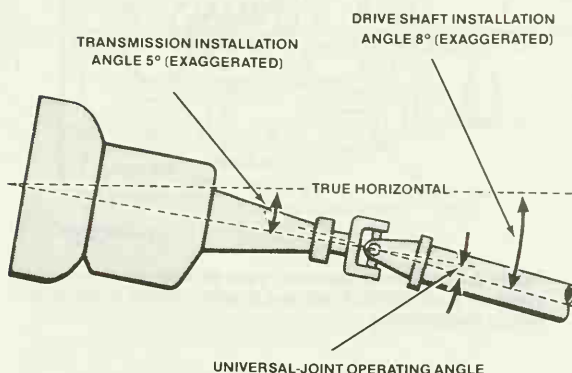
The transmission and drive shaft installation angles determine the universal-joint operating angle. (Ford Motor Company)
